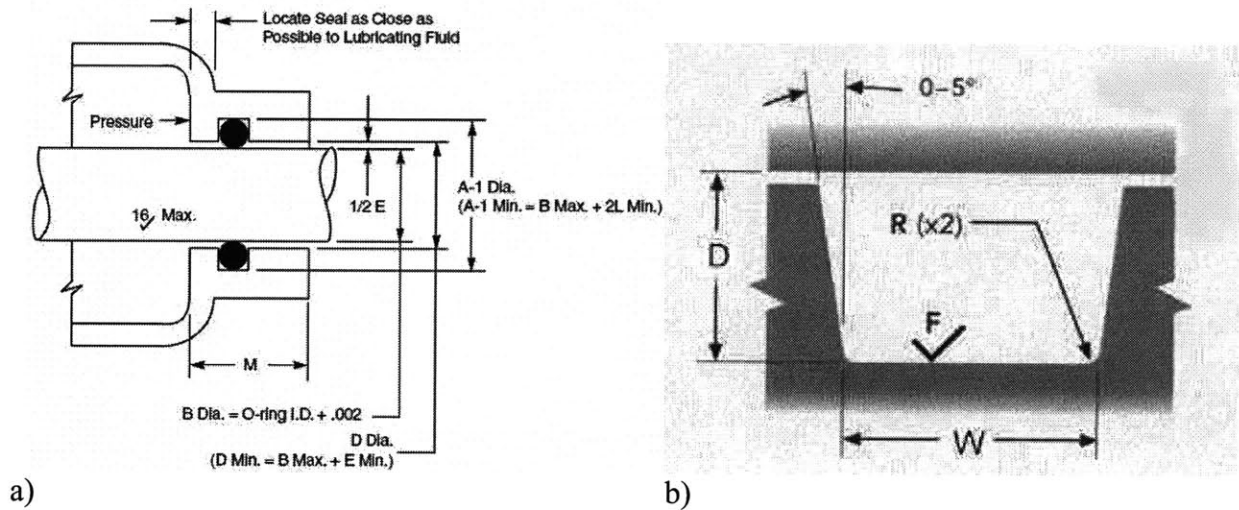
Parker o-ring gland design specifications, a) shaft seal, b) face seal
